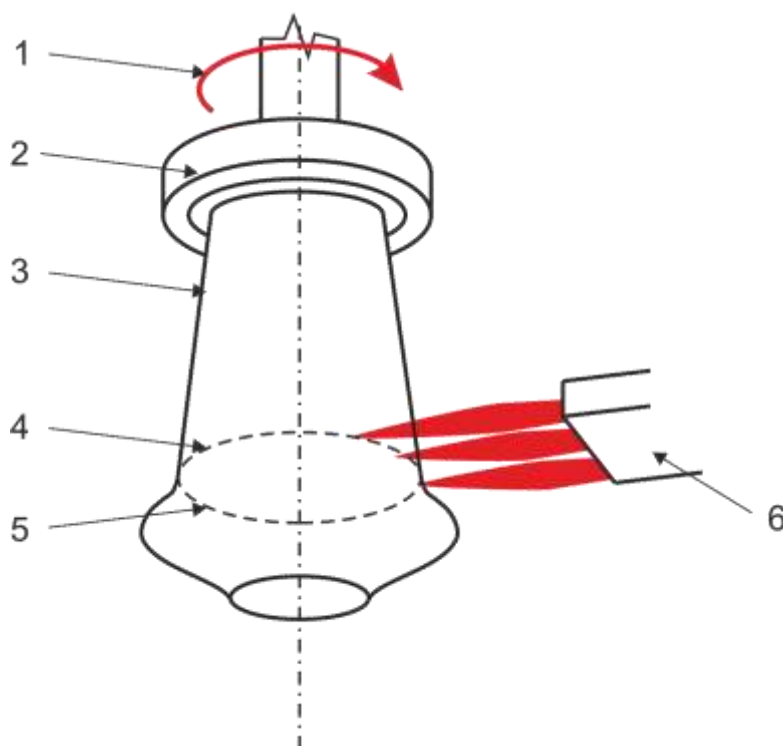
Principle of cracking-off with a multi-flame burner: 1 - direction of movement of glass semi-finished products, 2 - vacuum clamping element, 3 - product, 4 - notch, 5 - moil, 6 - burner
